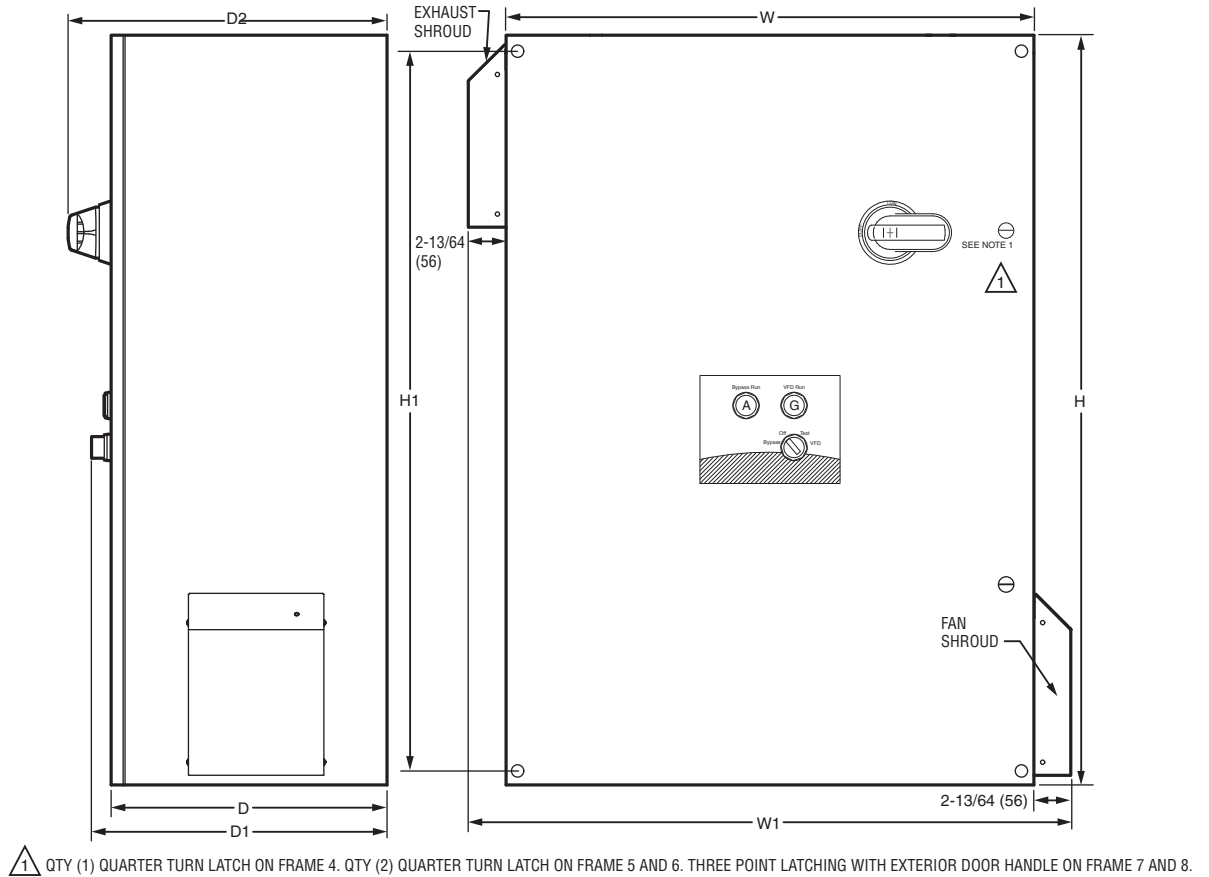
Frame 6 NEMA 1: 3 Contactor and 3 Contactor with Auto-bypass Dimensional Drawings.
